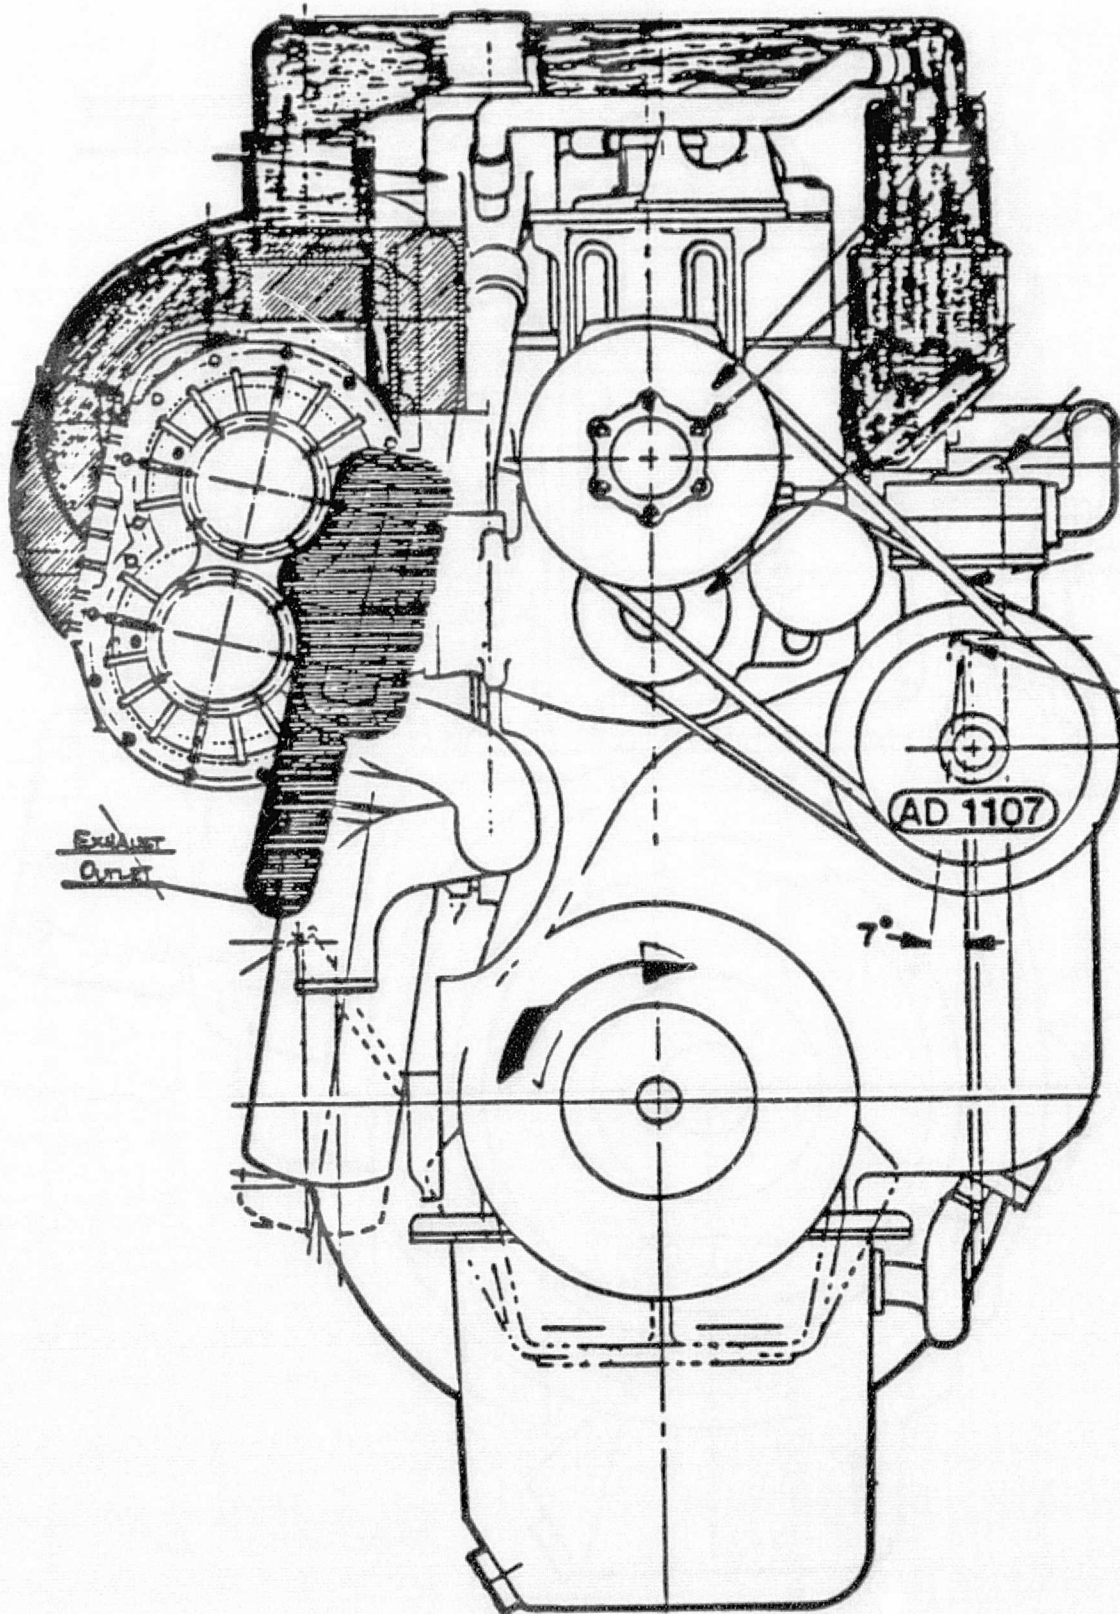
VIEW OF SCREW COMPRESSOR AND EXPANDER MOUNTING ARRANGEMENT
